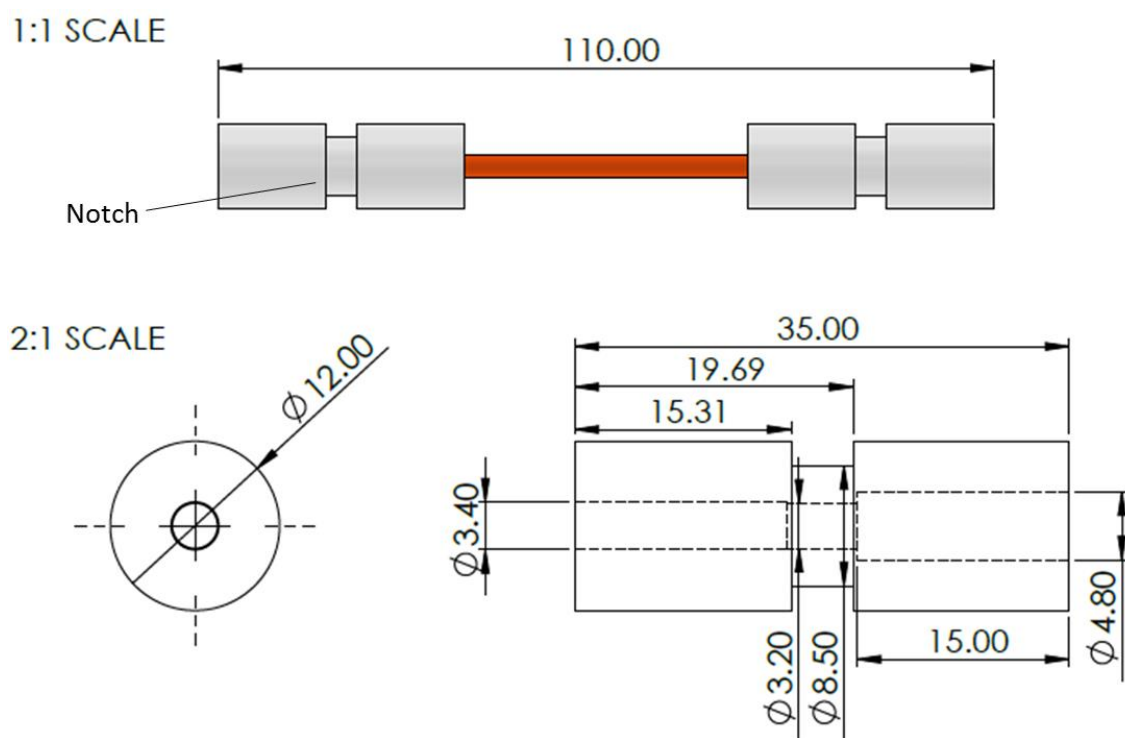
CAD design of the Kapton-FEP unions showing an assembled window section (1:1 scale) and a single union piece (2:1 Scale). All dimensions in mm.
